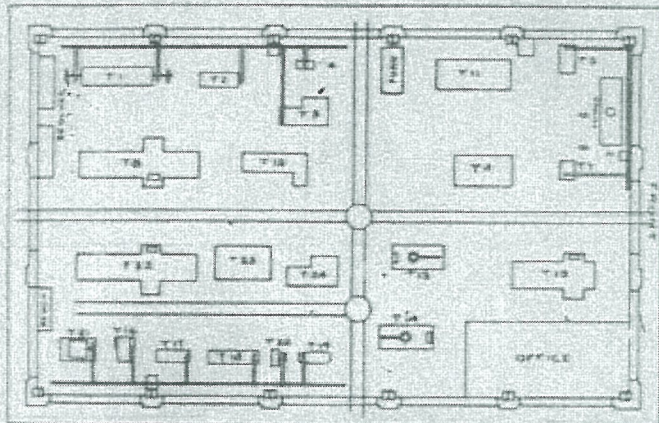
Plan and Tool Layout of Frog and Track Shop.
